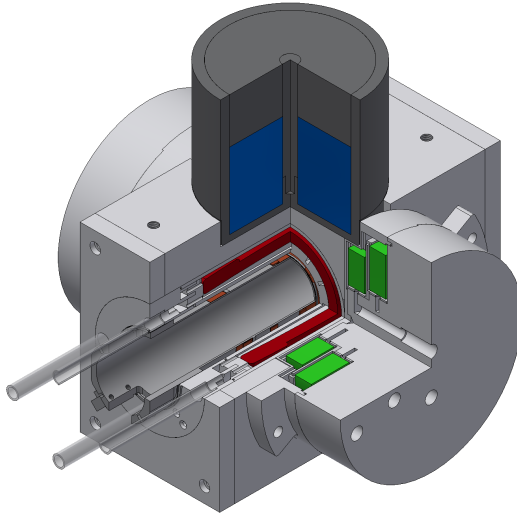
CAD image of the MPIv3 coil system assembly, with a quarter section cut open to reveal the coils. The windings of the  $x$  axis drive coil have been colored in red, the  $y$  axis is depicted in green and the gradient magnets are shown as blue.
